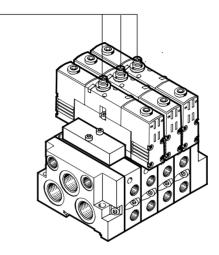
/7: Electrical components of the VTIA valve manifold with valves with central plug
